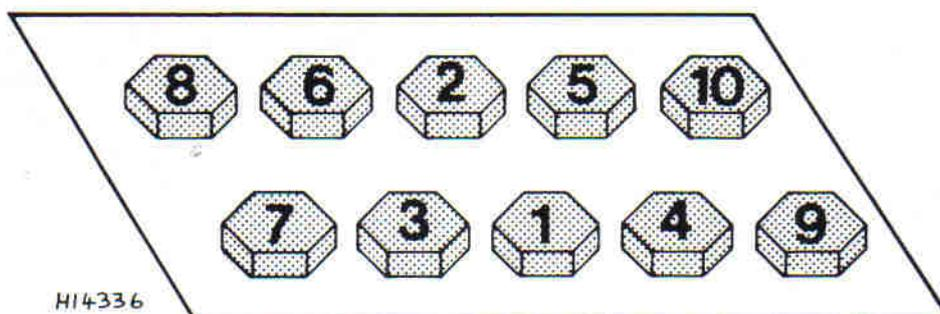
Cylinder head bolt tightening sequence – OHC engines (Sec 29)
